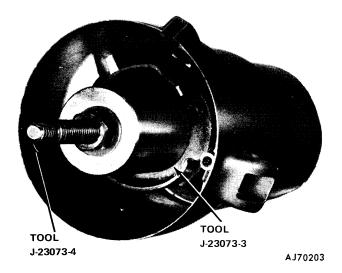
Pulling Shift Tube into Shift Bowl
